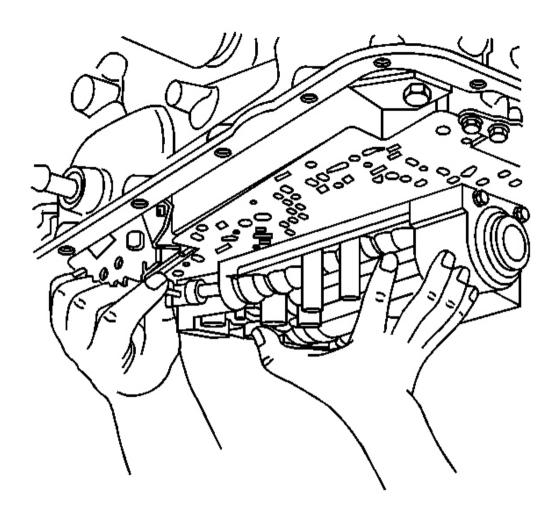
View Of Valve Body To The Transmission Case Courtesy of GENERAL MOTORS CORP.
